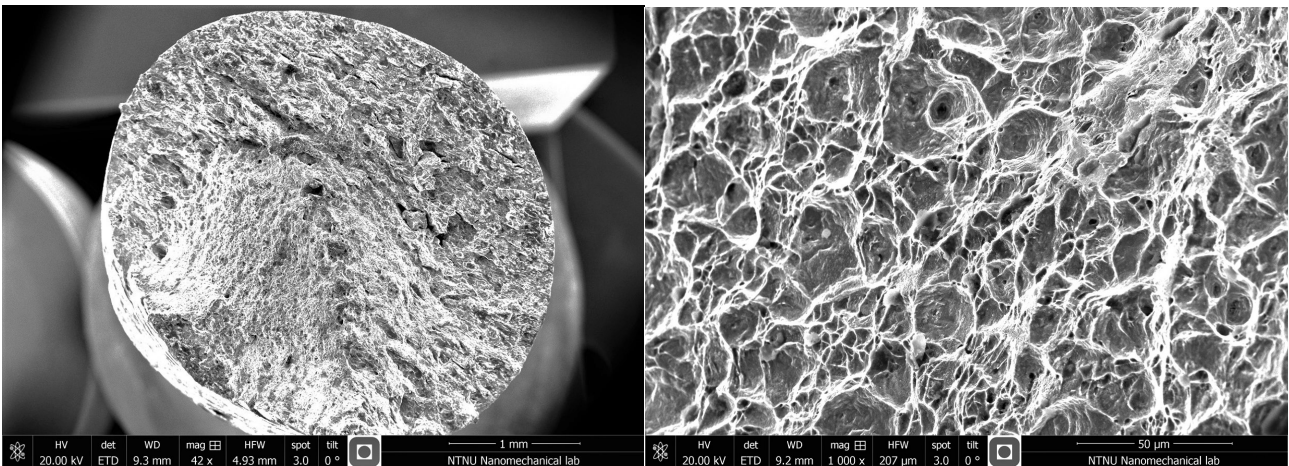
Images showing the fracture surface of the reference specimen for material C.
